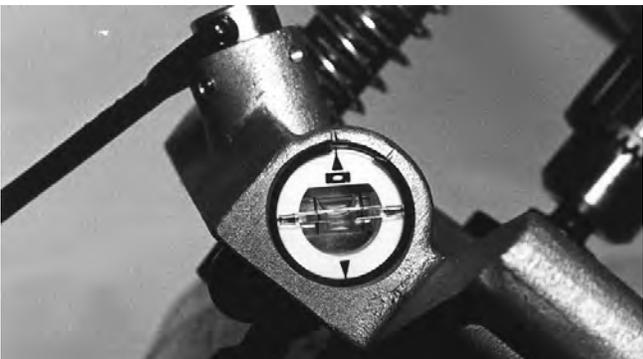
HC-450 Hole Cutting Tool Level Vial
